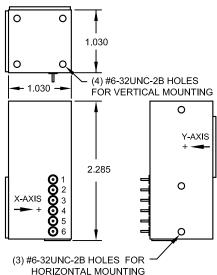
HORIZONTAL MOUNTING PLATE
